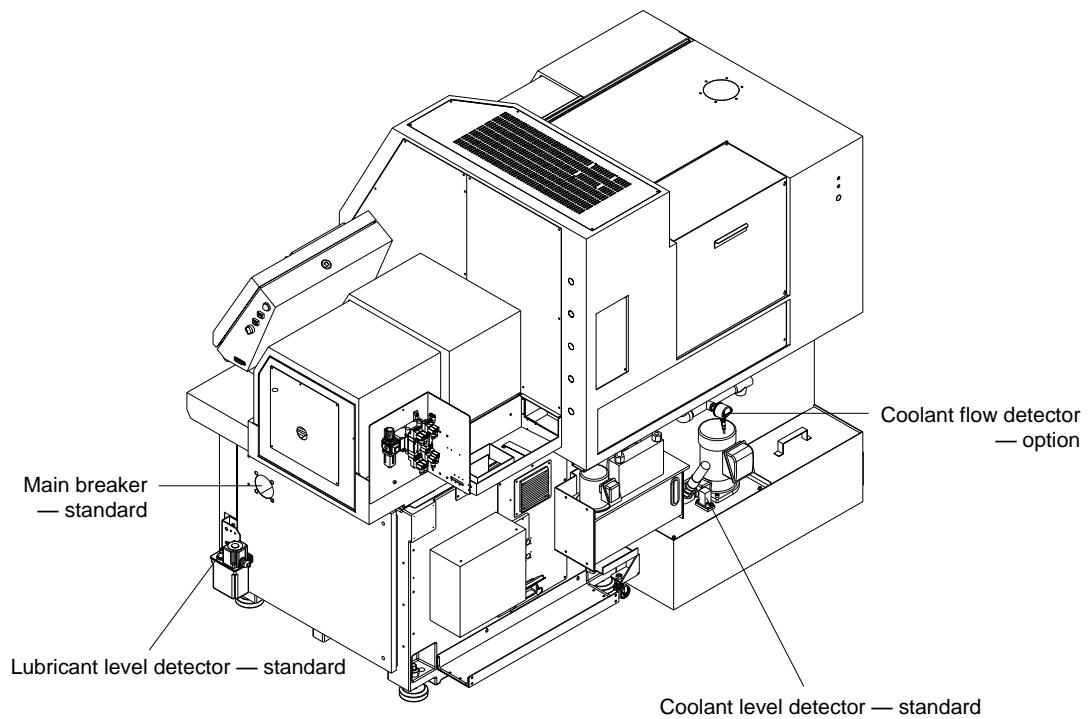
Locations of the safety devices (rear view of the machine)
